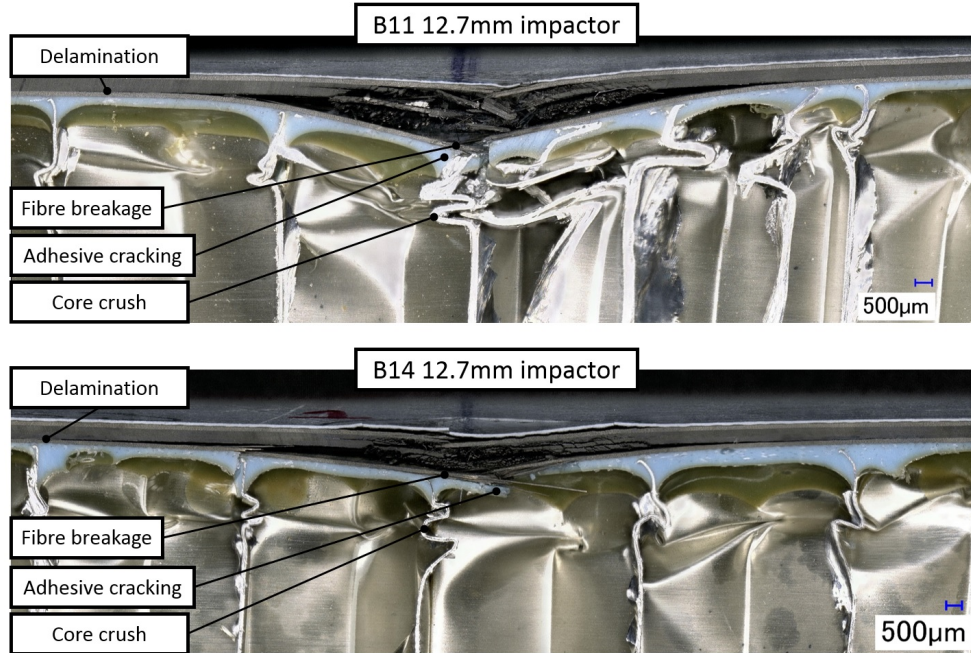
B11 and B14 12.7 mm impact cross section with laminate damage, adhesive cracking and core crush.
